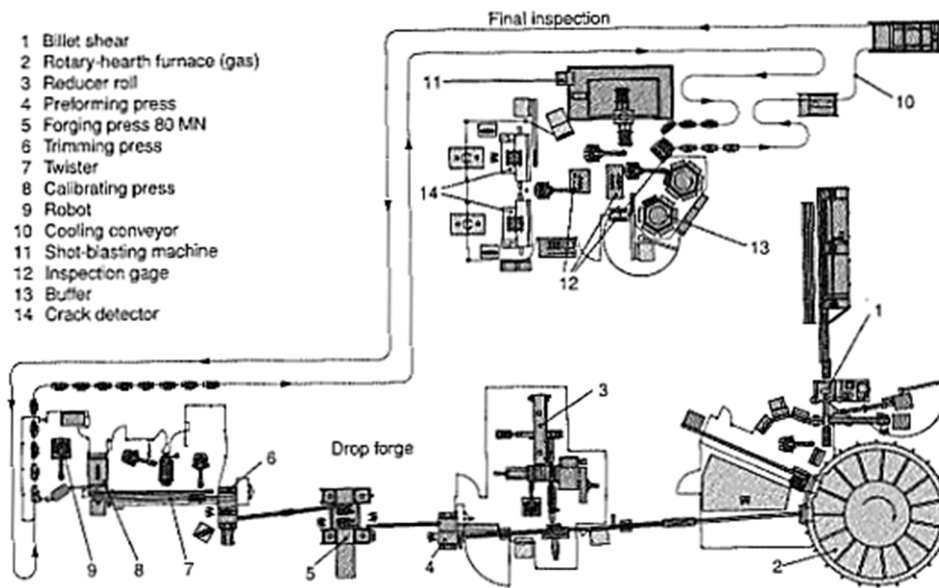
Layout of a forging line for crankshaft manufacturing [45].
